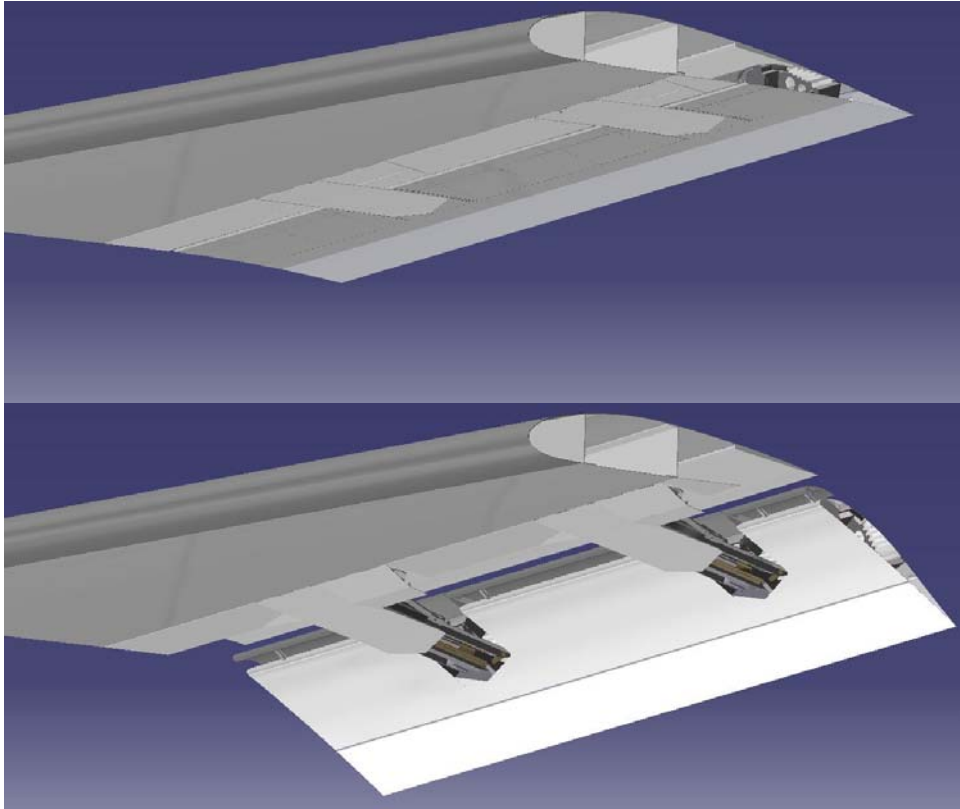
Wing section bottom view with flaps fully retracted and extended
